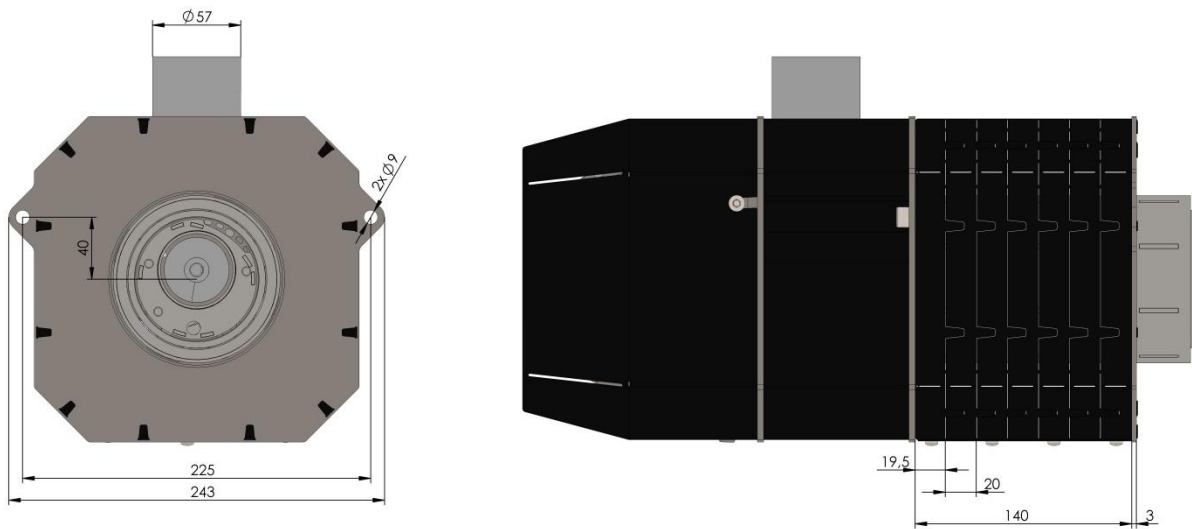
Burner view 4-16 kW with isolation jacket and mounting plate.
